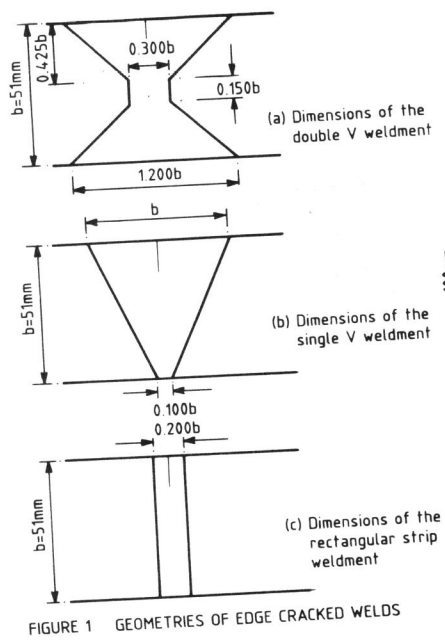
GEOMETRIES OF EDGE CRACKED WELDS
